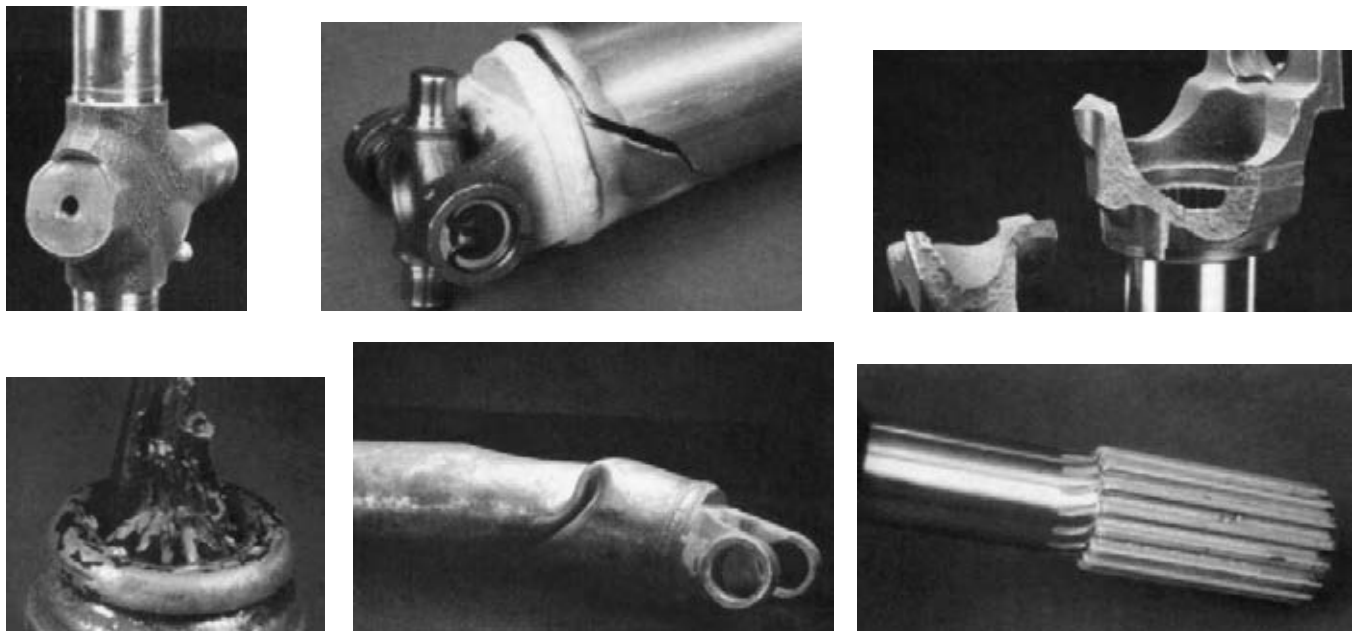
Many power train engineers consider the driveline to be the “fuse” for the power train. It is less expensive to replace these broken parts than to replace parts inside a transmission or drive axle. (Courtesy of Dana Corporation)
